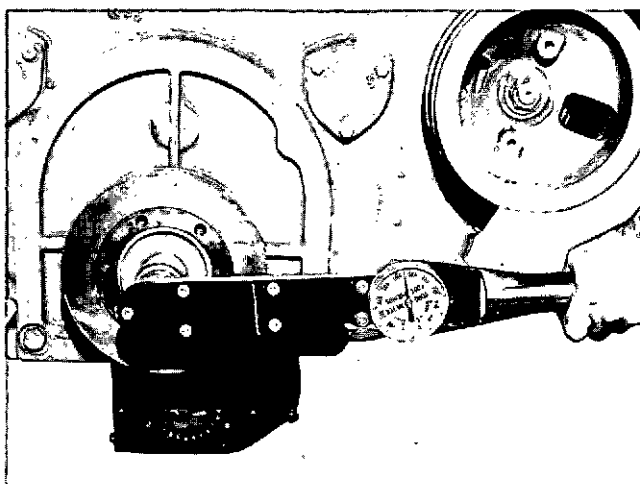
, V414167. Tighten flange to crankshaft capscrew
